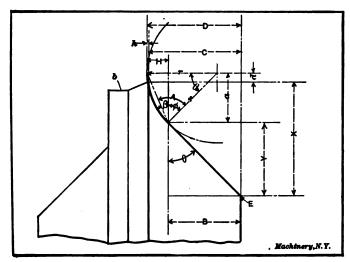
Diagram for Determining Dimensions of Circular Cut-off Tool which forms Part of a Spherical Screw Head
